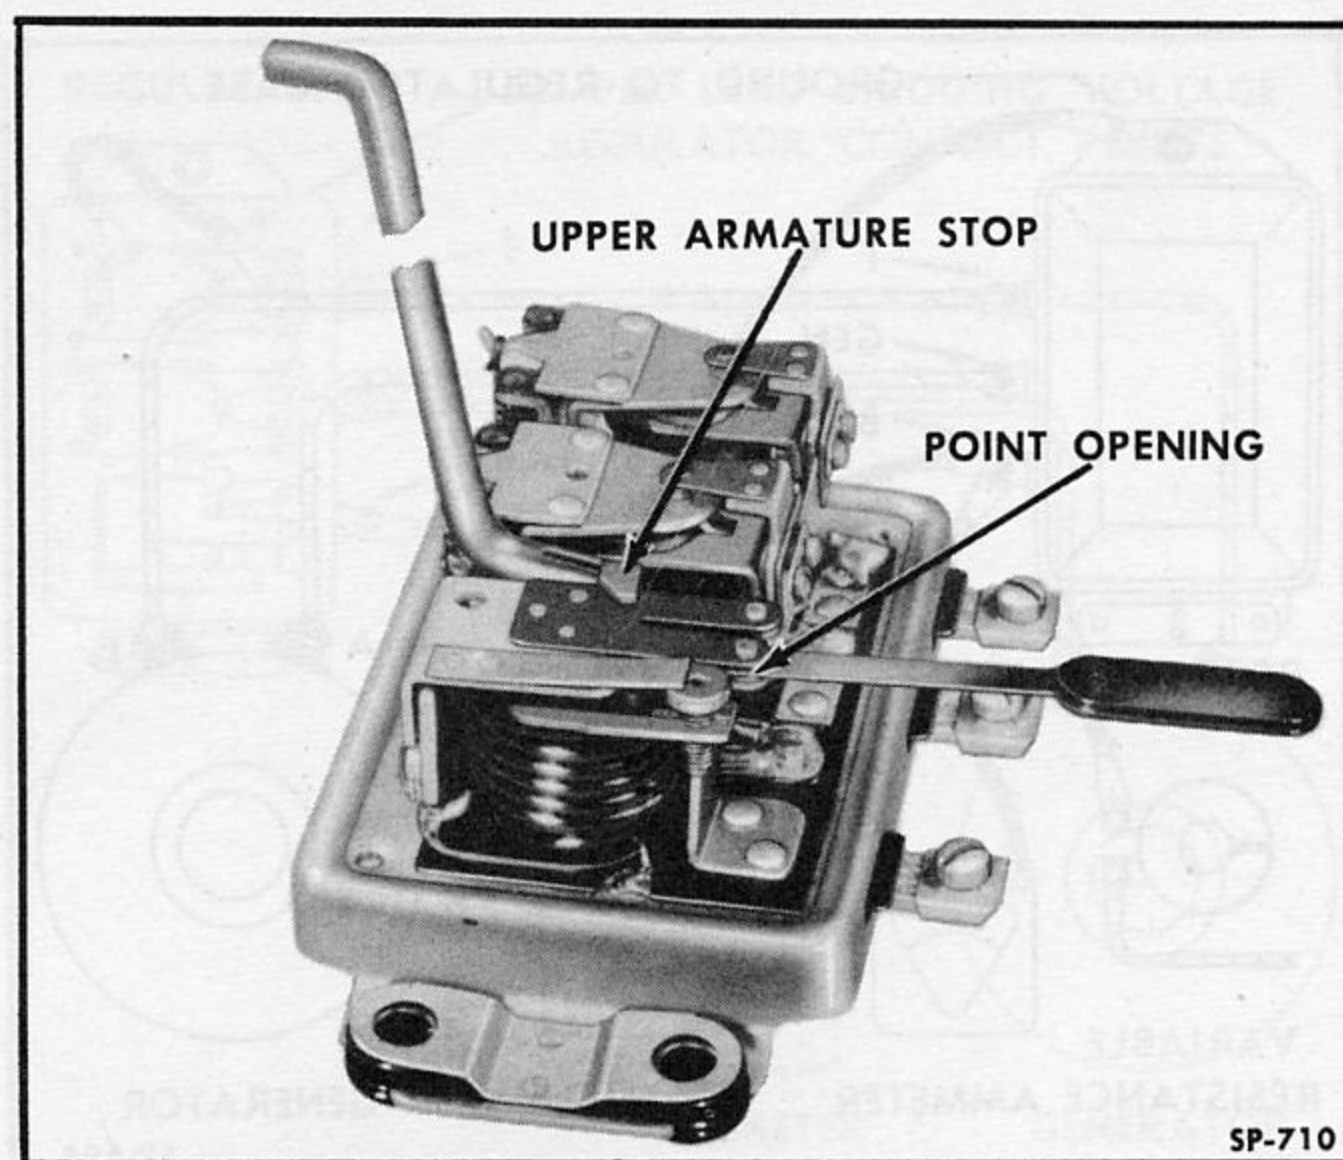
Adjusting Delco-Remy Cut-Out Relay Point Gap
